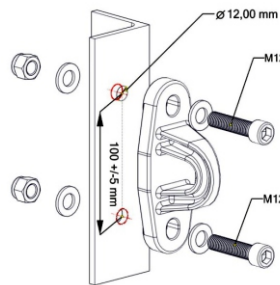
Method of screwing anchor point on steel structure using torque wrench
